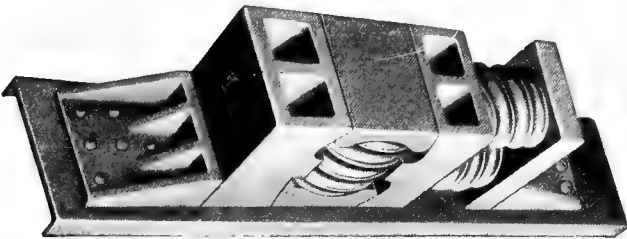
Butler Friction Draft Gear No. 370 with One Draft Sill Removed.
